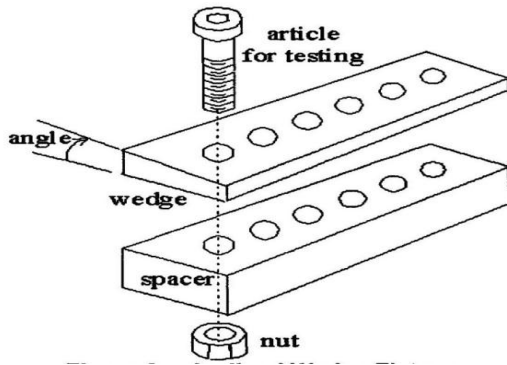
Inclined Wedge Fixture (ASTM B839) [18]
